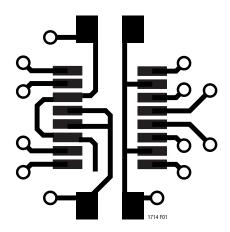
Typical Topside Metal for Multilayer PCB Layout
